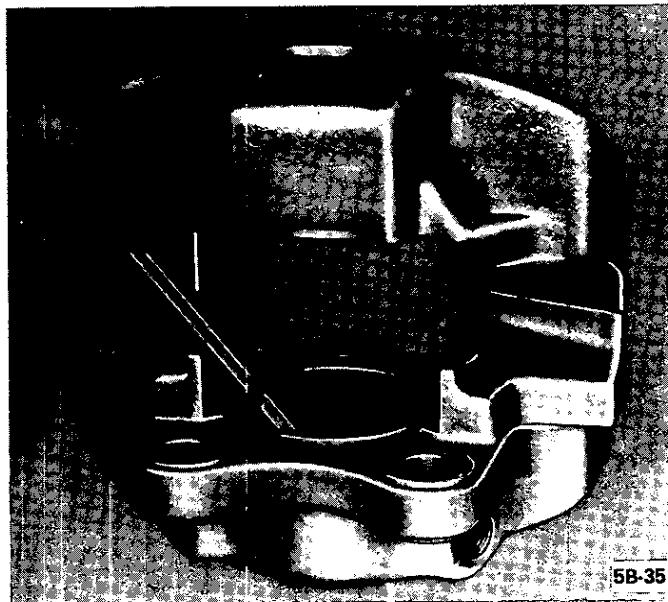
B-35 Removing Rubber Fluid Seal From Caliper Bore
